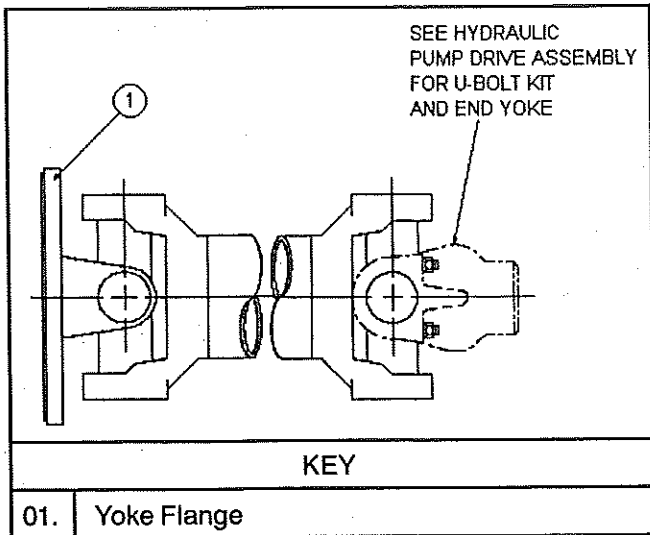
DRIVESHAFT ASSEMBLY (84202A)
